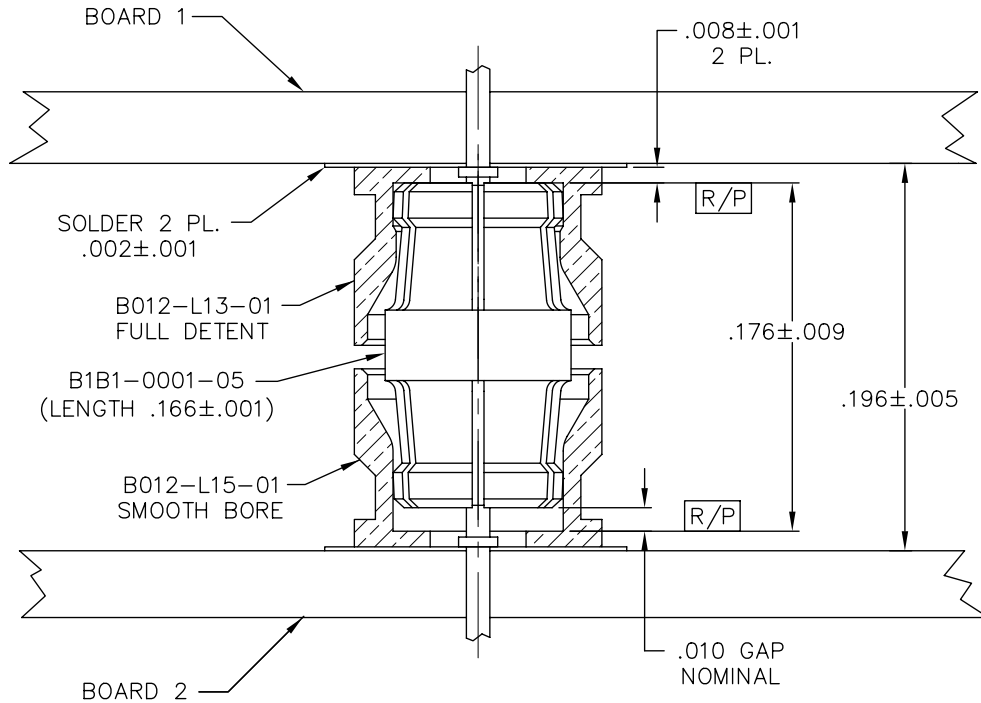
GPPO Minimum Board-to-Board Tolerance Analysis
